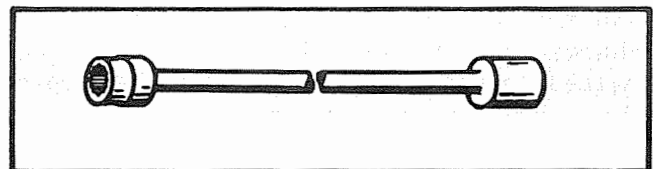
Push Rod Housing Adapter Attaching Nut Wrench
